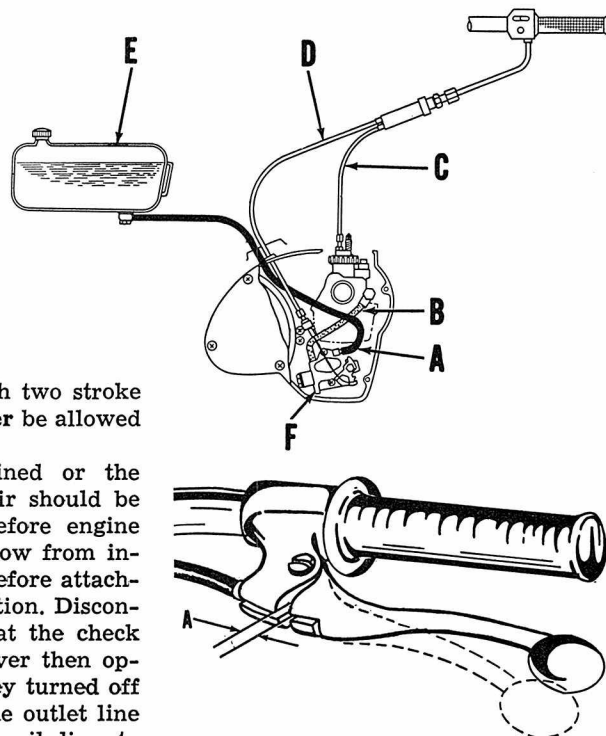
Drawing of "SUPERLUBE" oil injection system. Check valve is in the banjo fitting at rotary valve cover plate end of outlet line (B).
